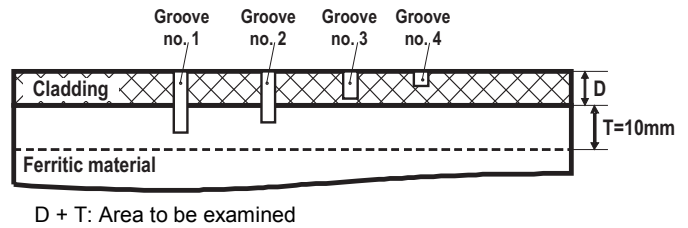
Location of grooves and beam angles for the examination for longitudinal defects of welded joints between ferritic and austenitic steels
